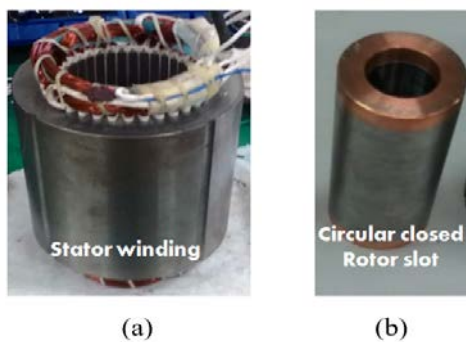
Prototype of the spindle motor, (a) stator, (b) rotor
